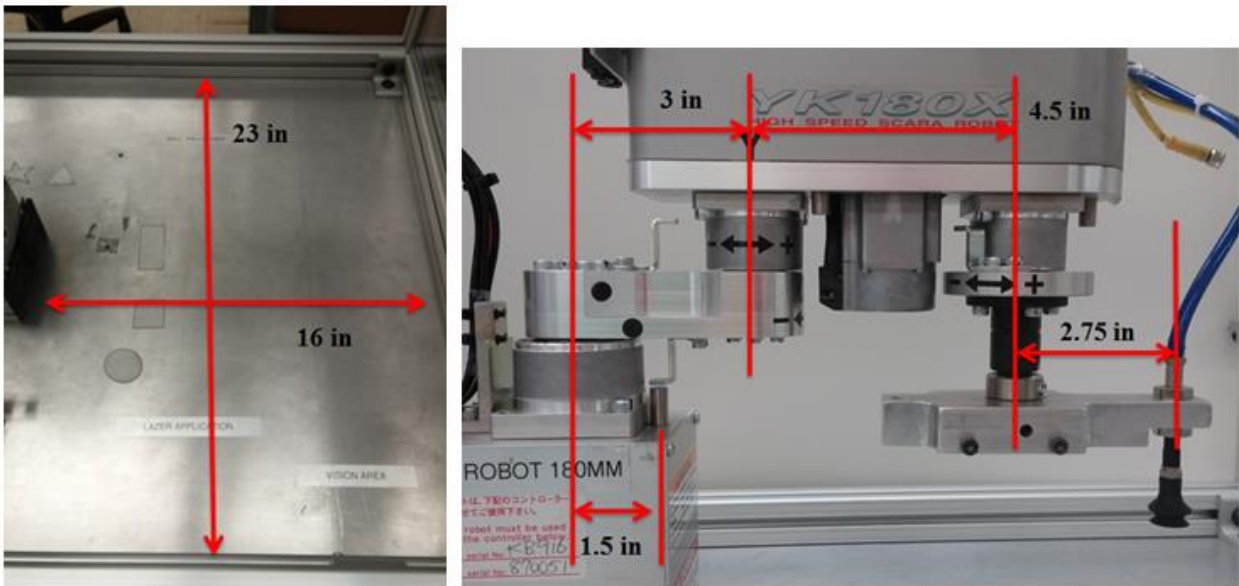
Robotic Platform Dimensions (Left), Robotic Arm Dimensions (Right)
